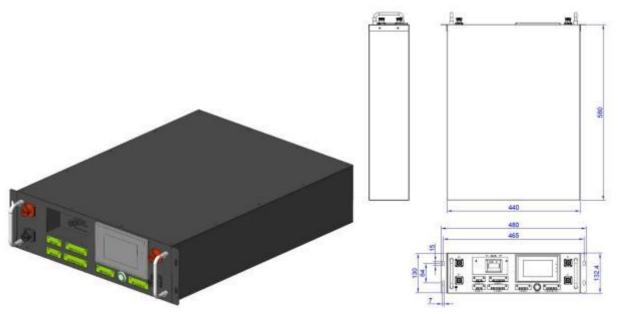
1 - 1 Appearance and Dimensional Drawing of High Voltage Box
